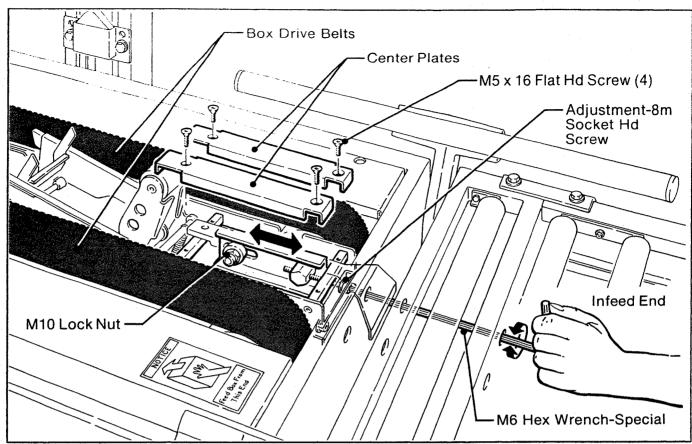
Box Drive Belt Tension Adjustment - Conveyor Bed Frame Infeed End
